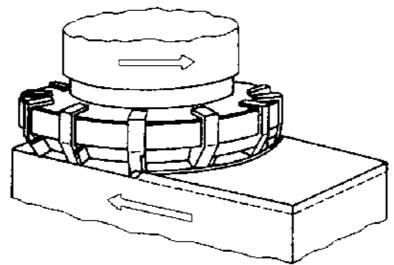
Cutter directly clamped on milling spindle (face milling cutter)
